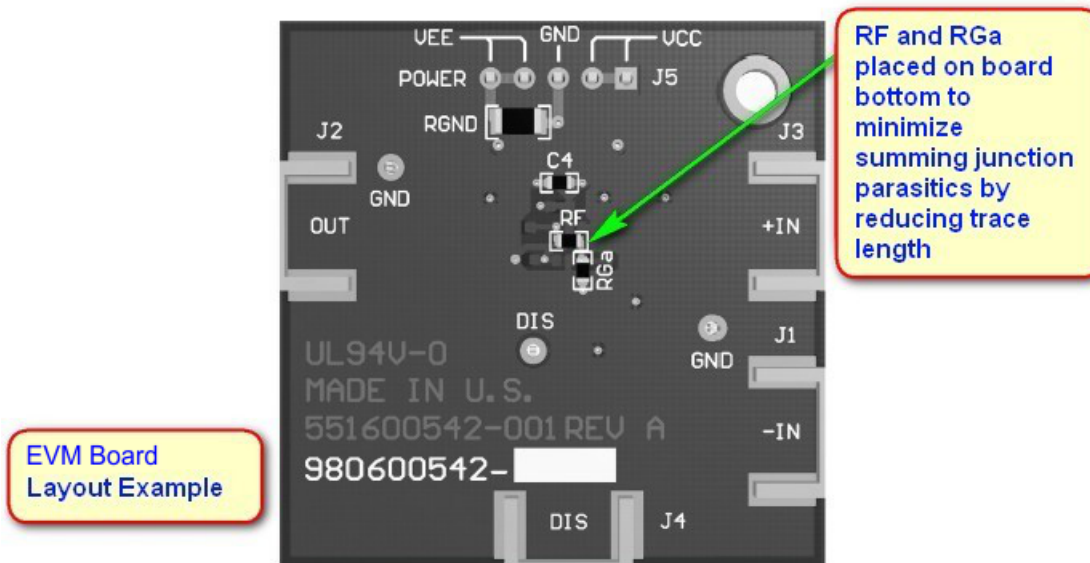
LMH6702-MIL Evaluation Board Layer 2
